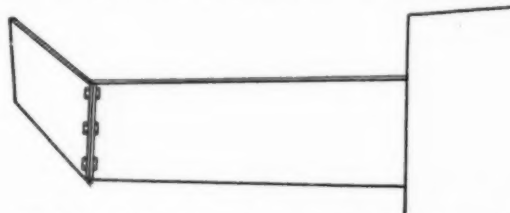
Sketch of Lander, with removable end or "bonnet" for preventing the flow of steel from hitting the side of the ladle.
